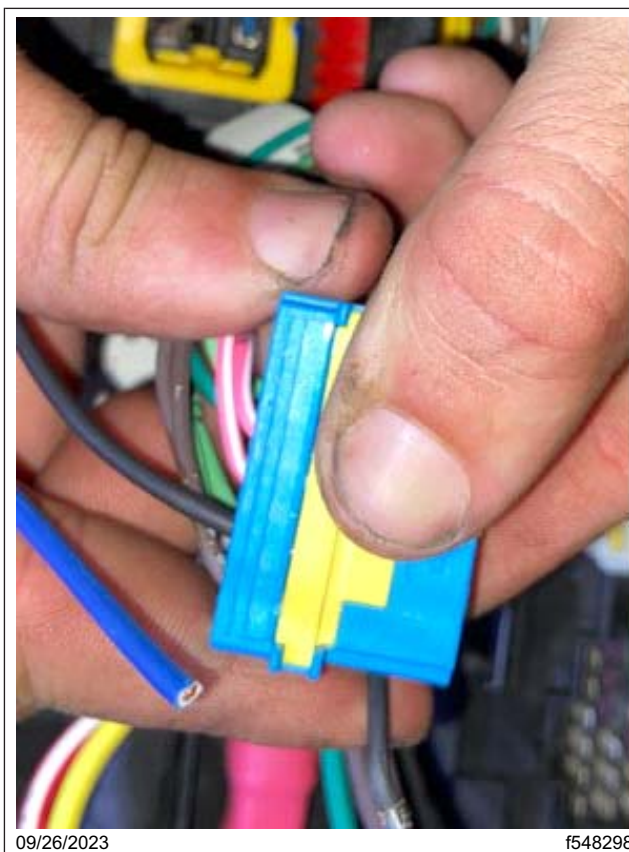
, Engaging the Lock on the SSAM X2 Connector
